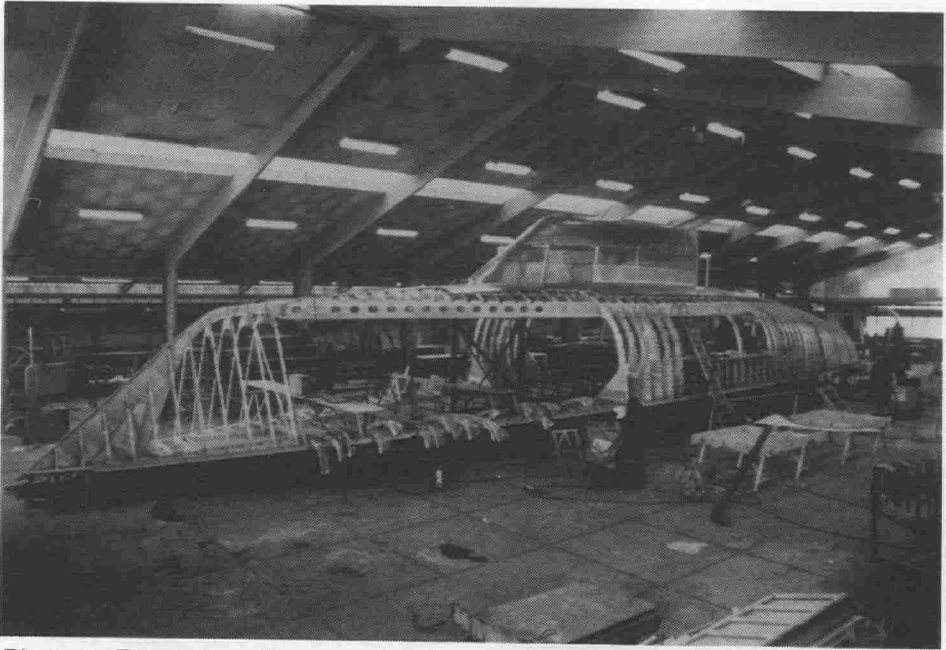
Frames, webframes, stembars and transom are welded to deck and keel section
